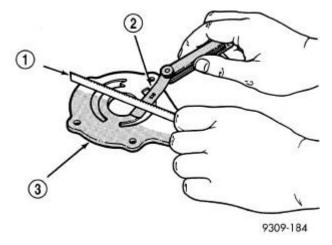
Checking Oil Pump Cover Flatness Courtesy of CHRYSLER LLC
